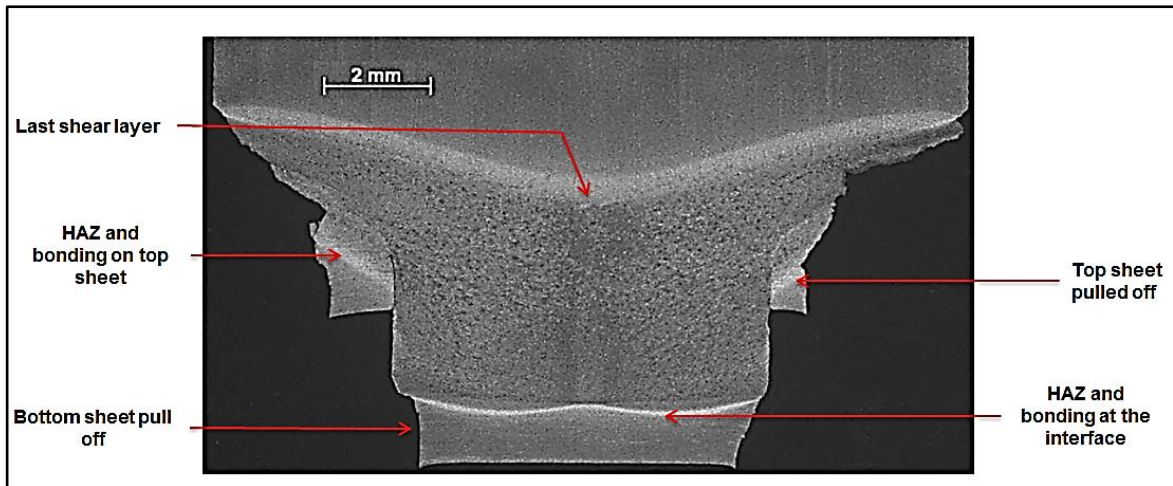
Blind hole 5000rev/min macrograph of pulled off rivet
